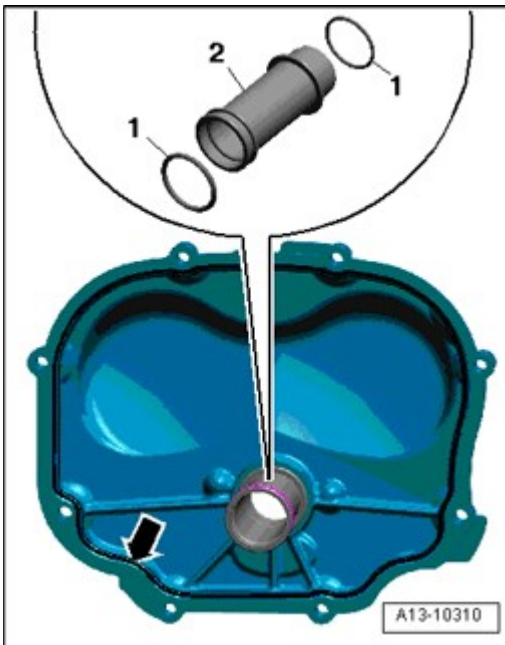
Identifying Timing Chain Cover, Coolant Intermediate Pipe, O-Rings, And Sealant Bead
